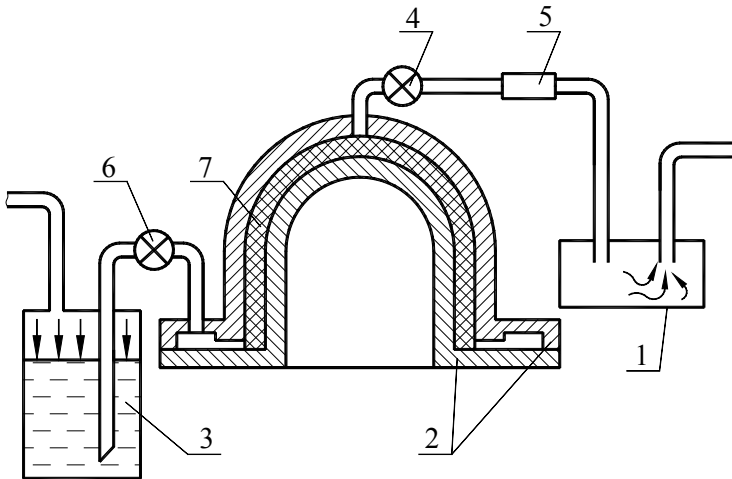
Formation of products by RTM-process: 1 – water filter; 2 – mold; 3 – vessel with connecting material; 4 – faucet of the vacuum line; 5 – vacuum pump; 6 – connecting material feed line faucet; 7 – reinforcement filler [own study]
